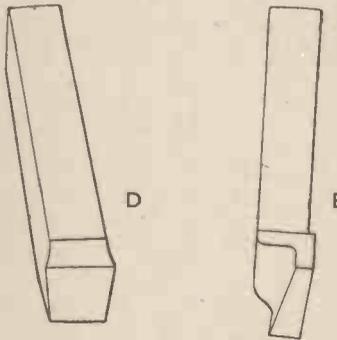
D. Square-nose finisher. E. Knife or side tool for cutting down faces.
